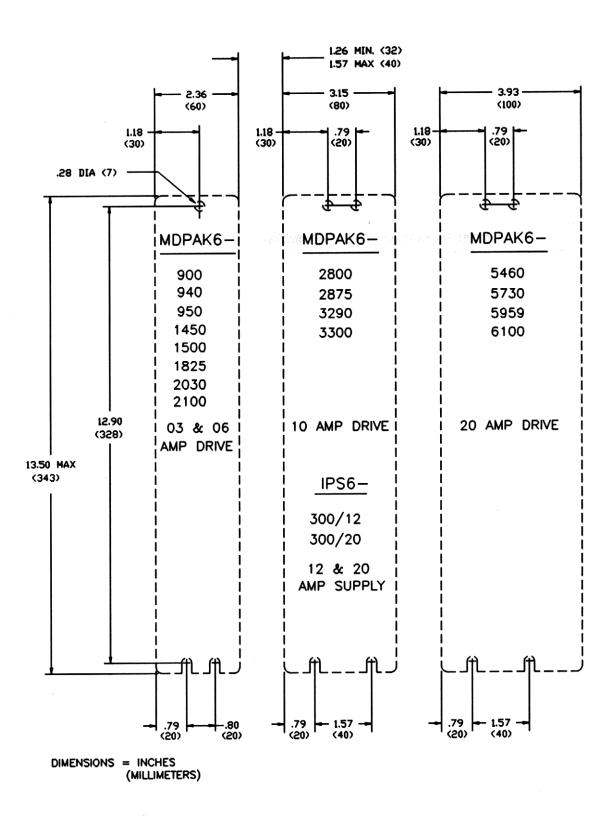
Drive and Power Supply Mounting Hole layouts (Previous Configuration)
